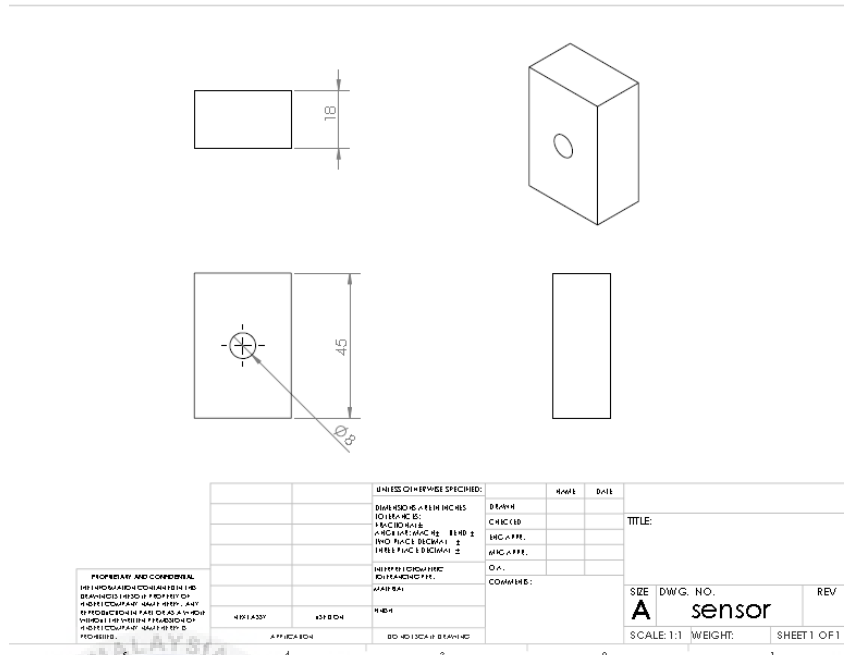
Plan CAD drawing for dust sensor of air duct robot
